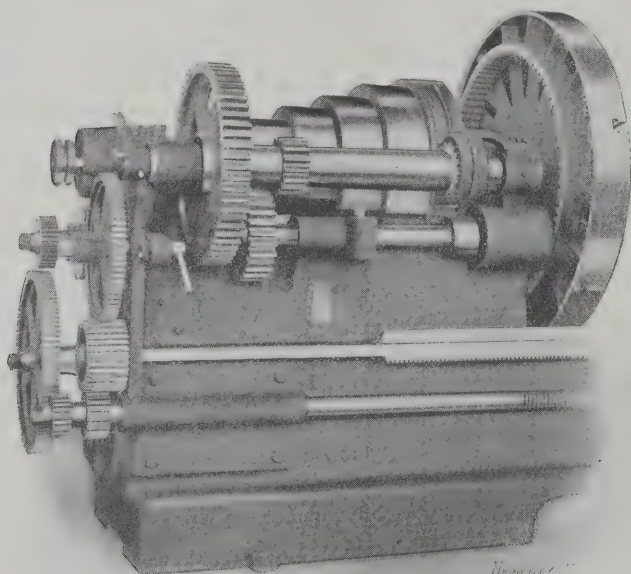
Driving and Feed Gearing of Fifield Lathe
